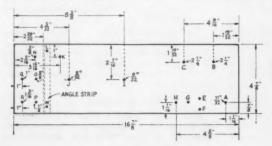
Sketch showing dimensions and layout of the chassis panel. Lettered points are identified in the text.
